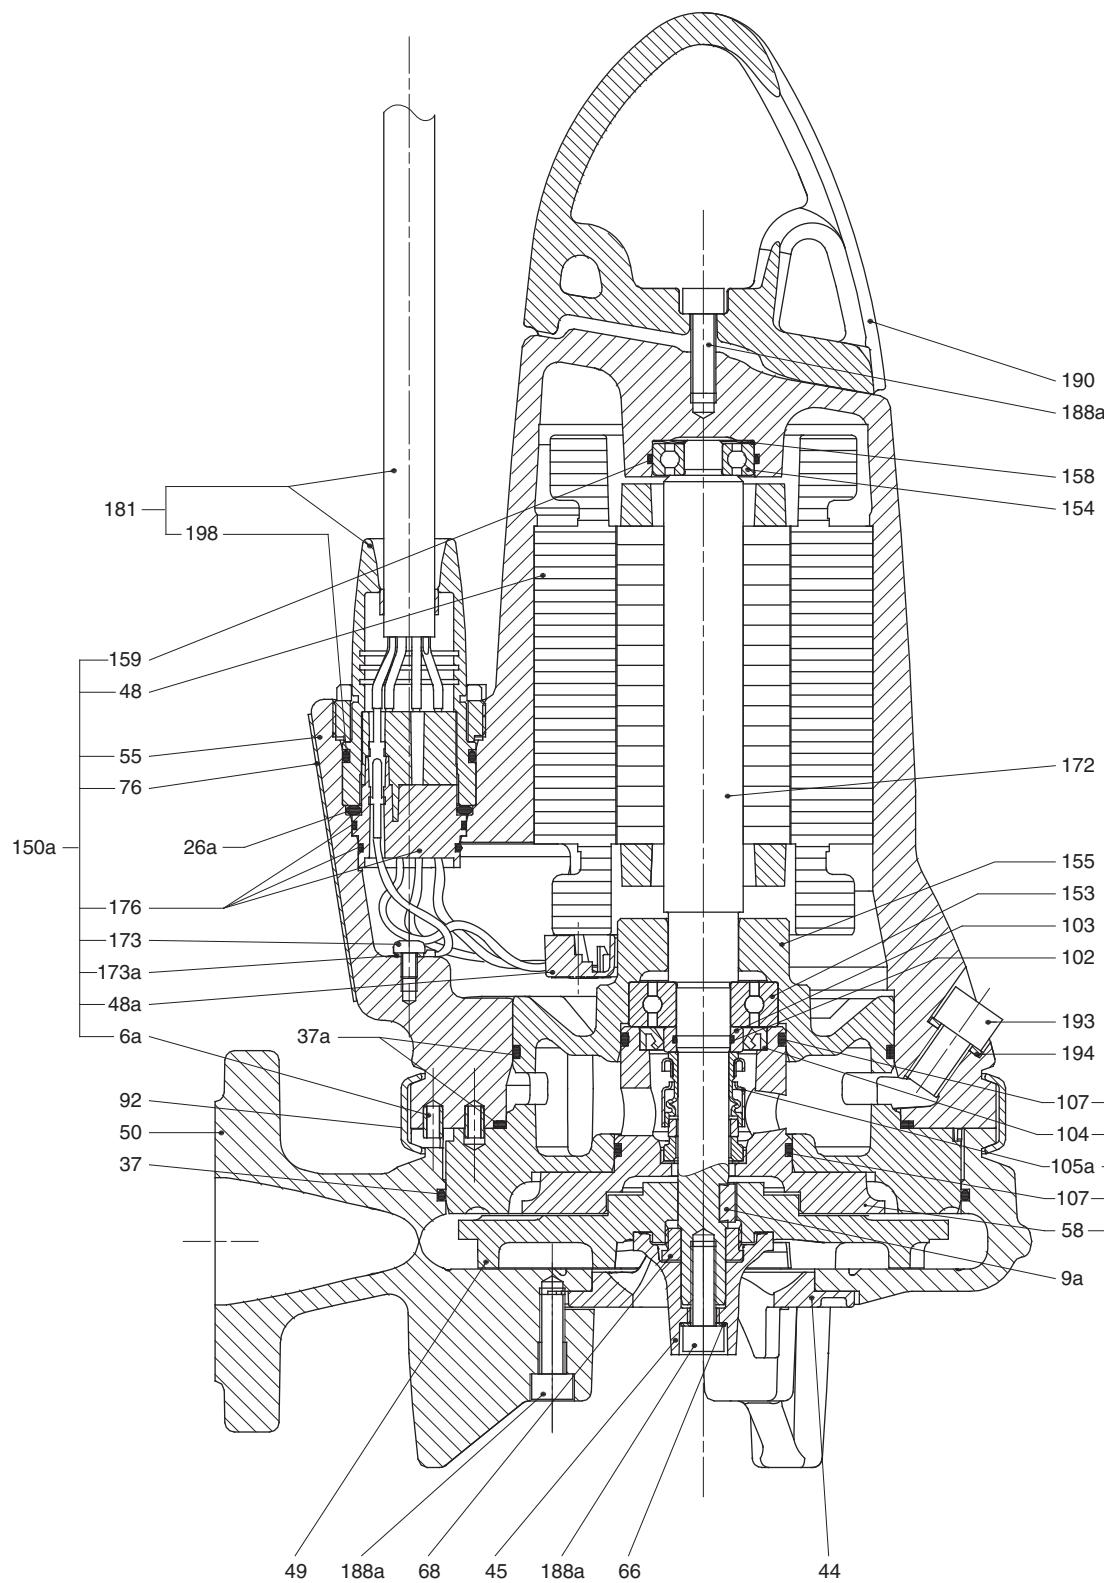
Sectional drawing of SEG pumps, 0.9, 1.2 and 1.5 kW
